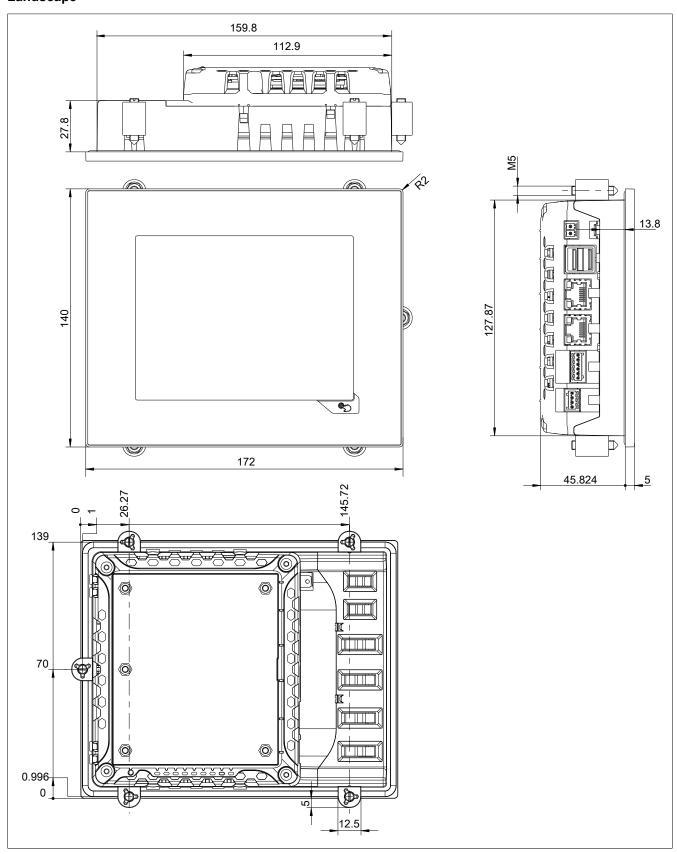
Dimensions - 4PPC70.057x-2xx - 4PPC70.0573
